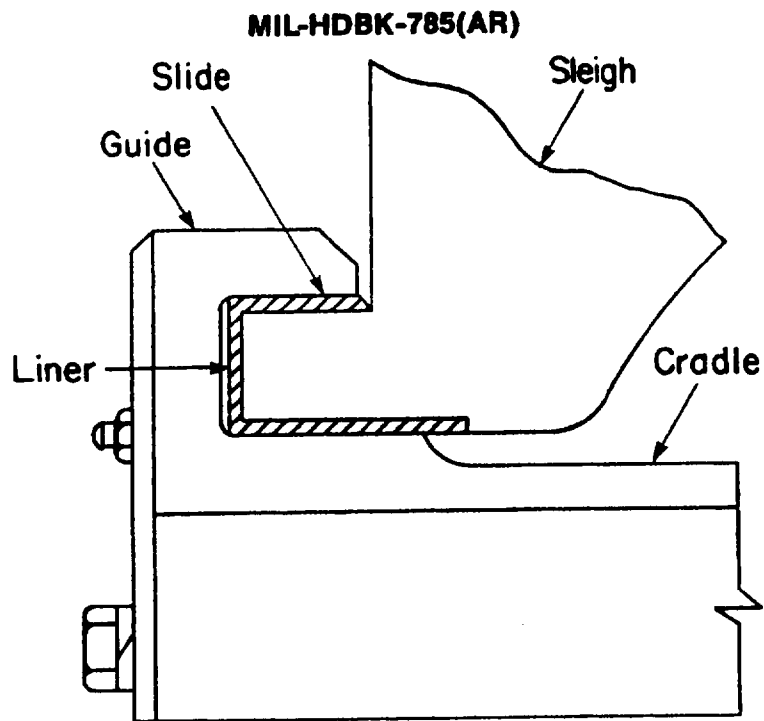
End View of Sliding Structure Showing Bearing Liner
